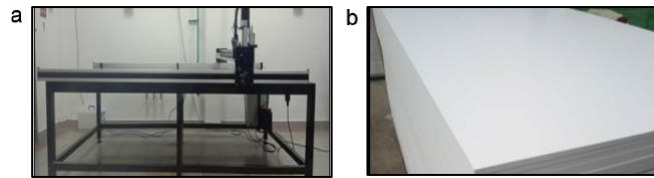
(a) CNC Router Machine; (b) Workpiece.
